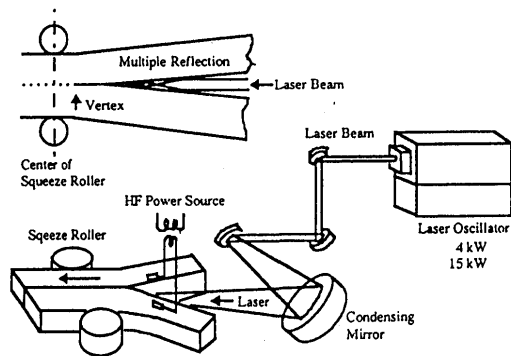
Combined HF and laser welding for production of pipe [3.6]
